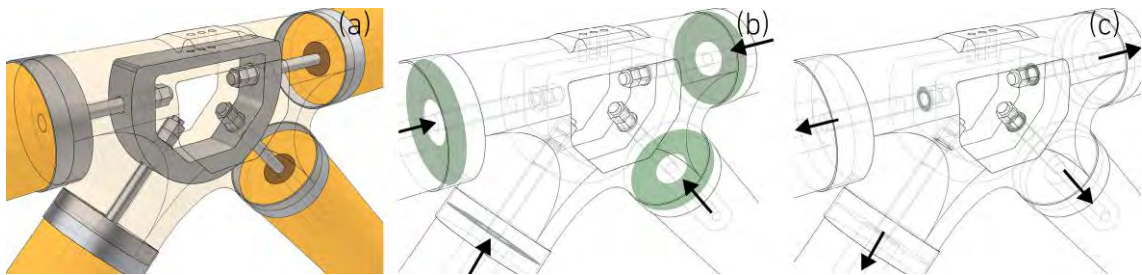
Moulded joint (a) and load introduction for compression (b) and tension (c)
